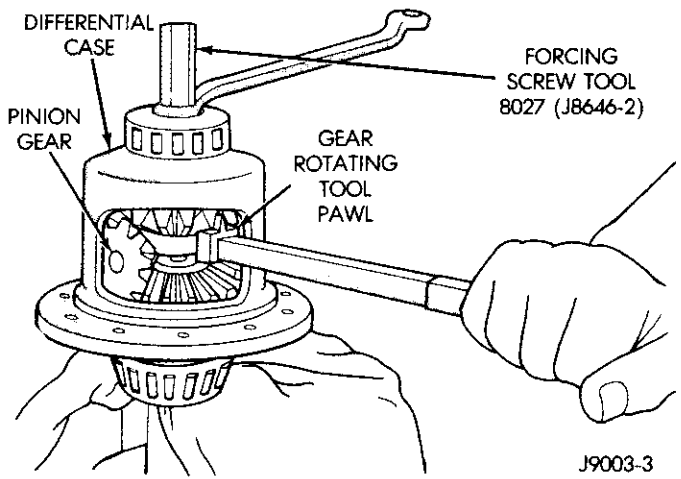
Gear Rotating & Forcing Screw Tool Installation
